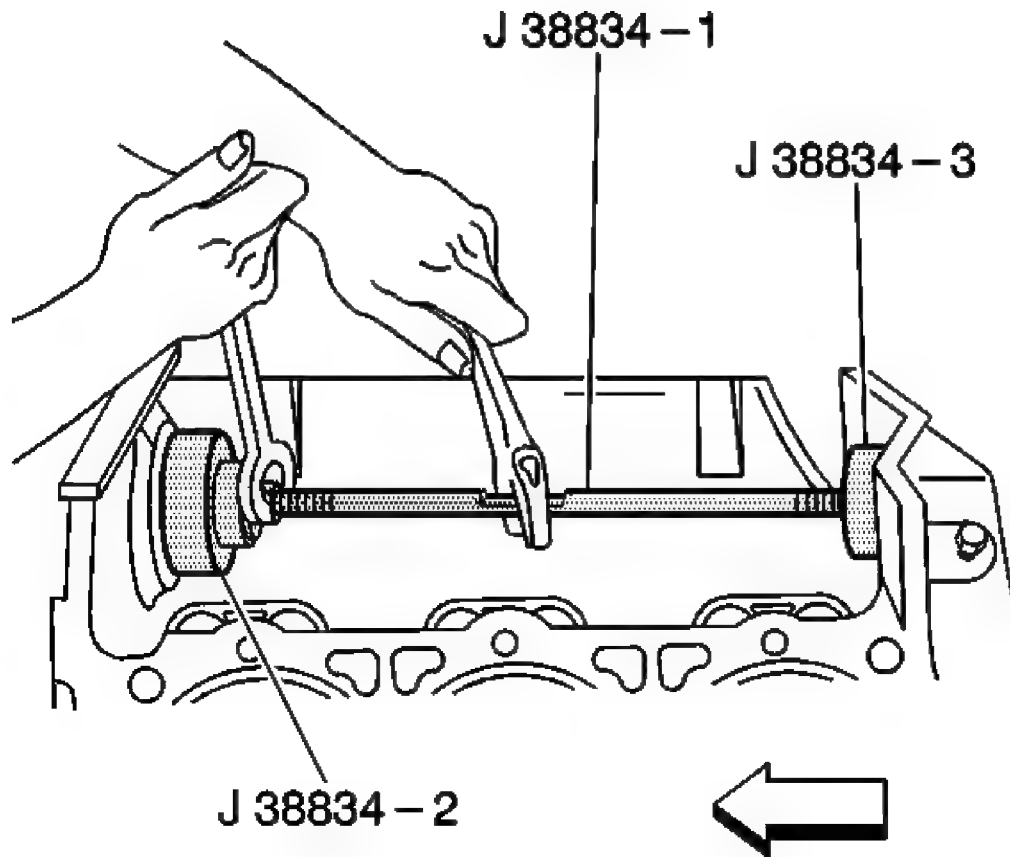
Installing Balance Shaft Bearing And/Or Bushing
